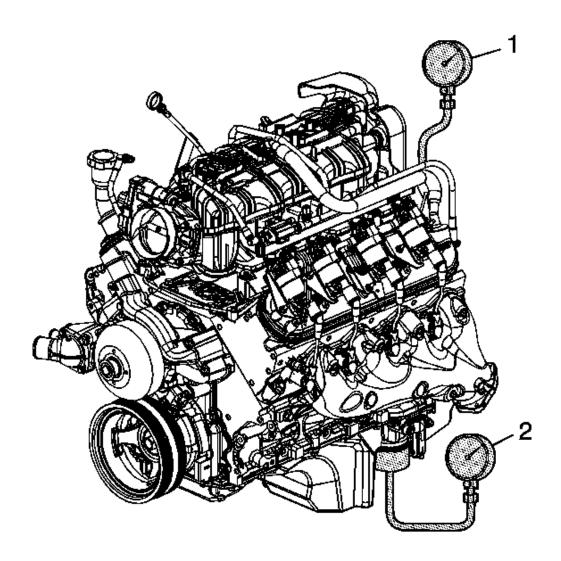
Measure Engine Oil Pressure Courtesy of GENERAL MOTORS CORP.
